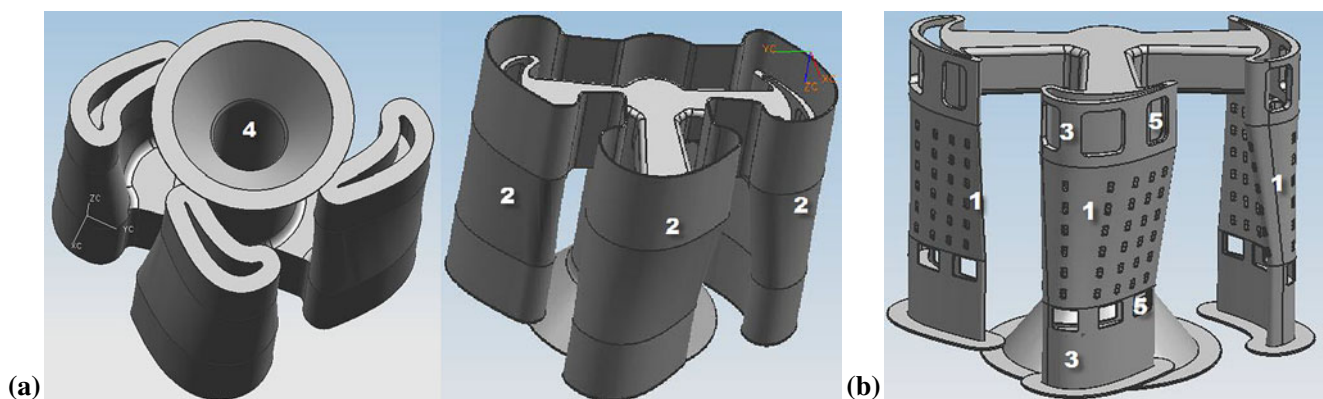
CAD model of the SL mold: a top surface and bottom surface, b internal structures
